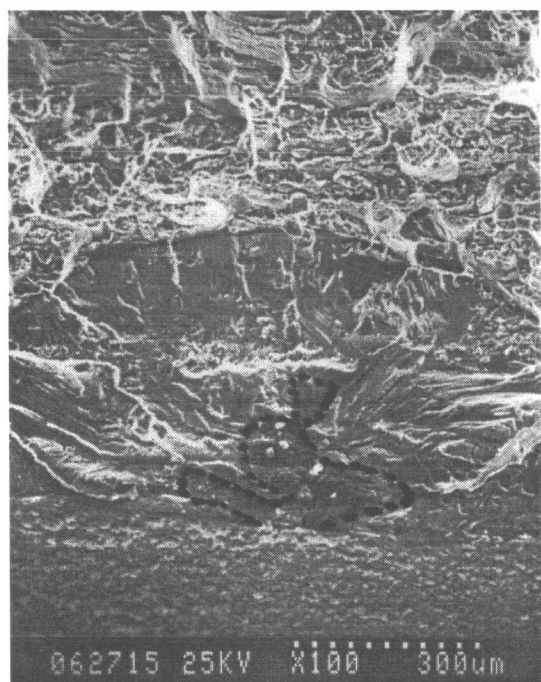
Fractograph of pre-corroded (336 hrs in 3.5 wt% NaCl solution) 7075-T7351 specimen fatigued at 276 MPa.
